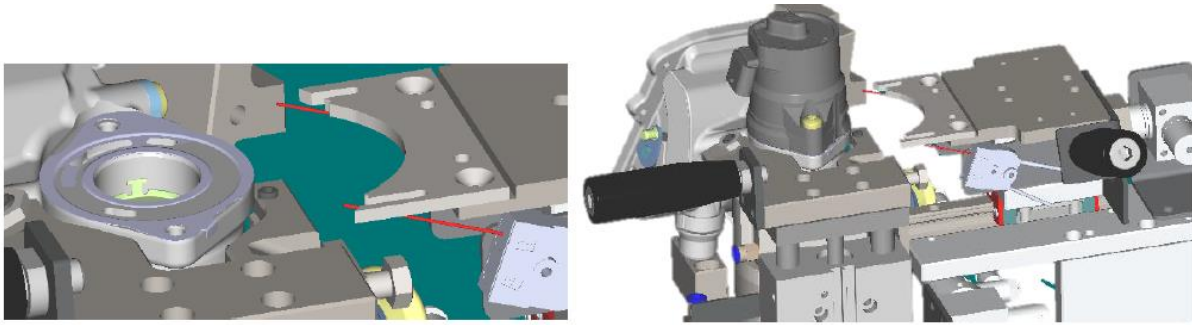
Poka-yokes that assure the correct assemble of parts
